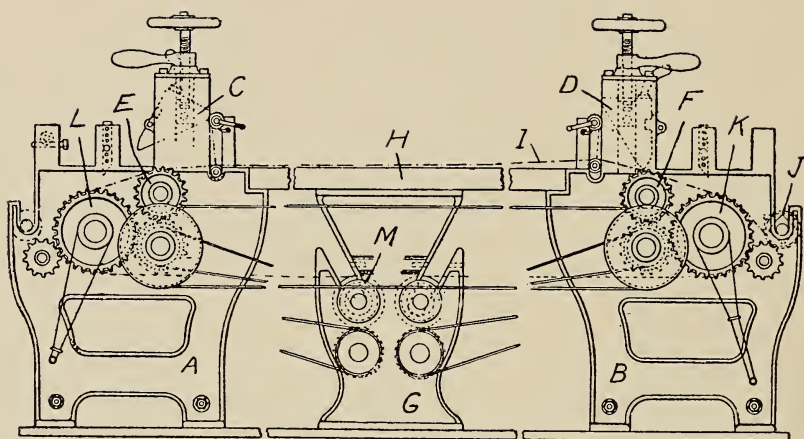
THE COULTER REVERSIBLE SPREADER.
